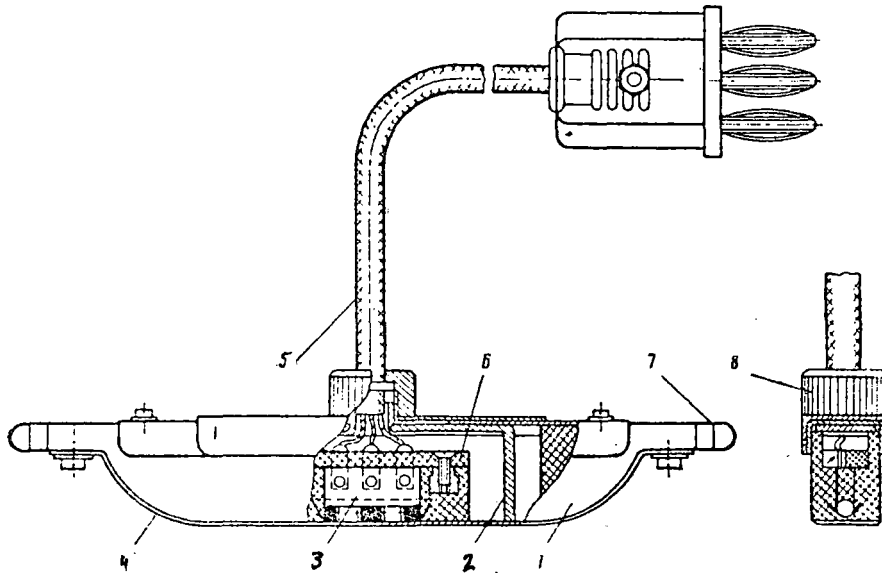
Sensor assembly of the MRD-66 flaw detector.
